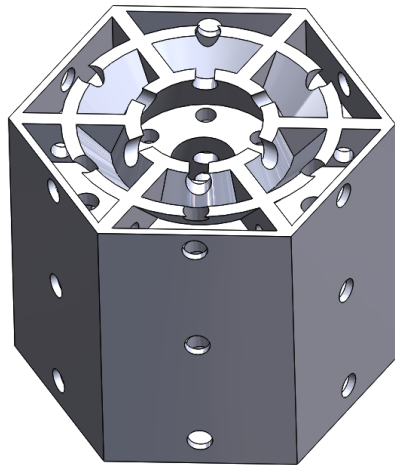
MIMO - Small Cavity AMM Cell - CAD - Horizontal Cross-Section View
